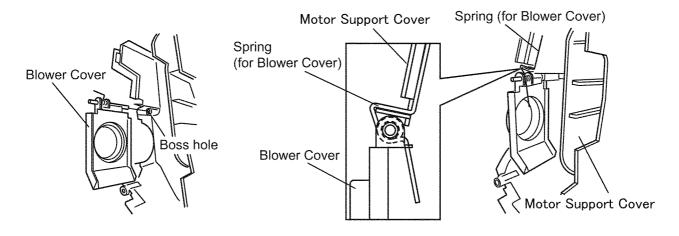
2. Assemble by inserting the shaft of the Blower Cover into the boss hole.
